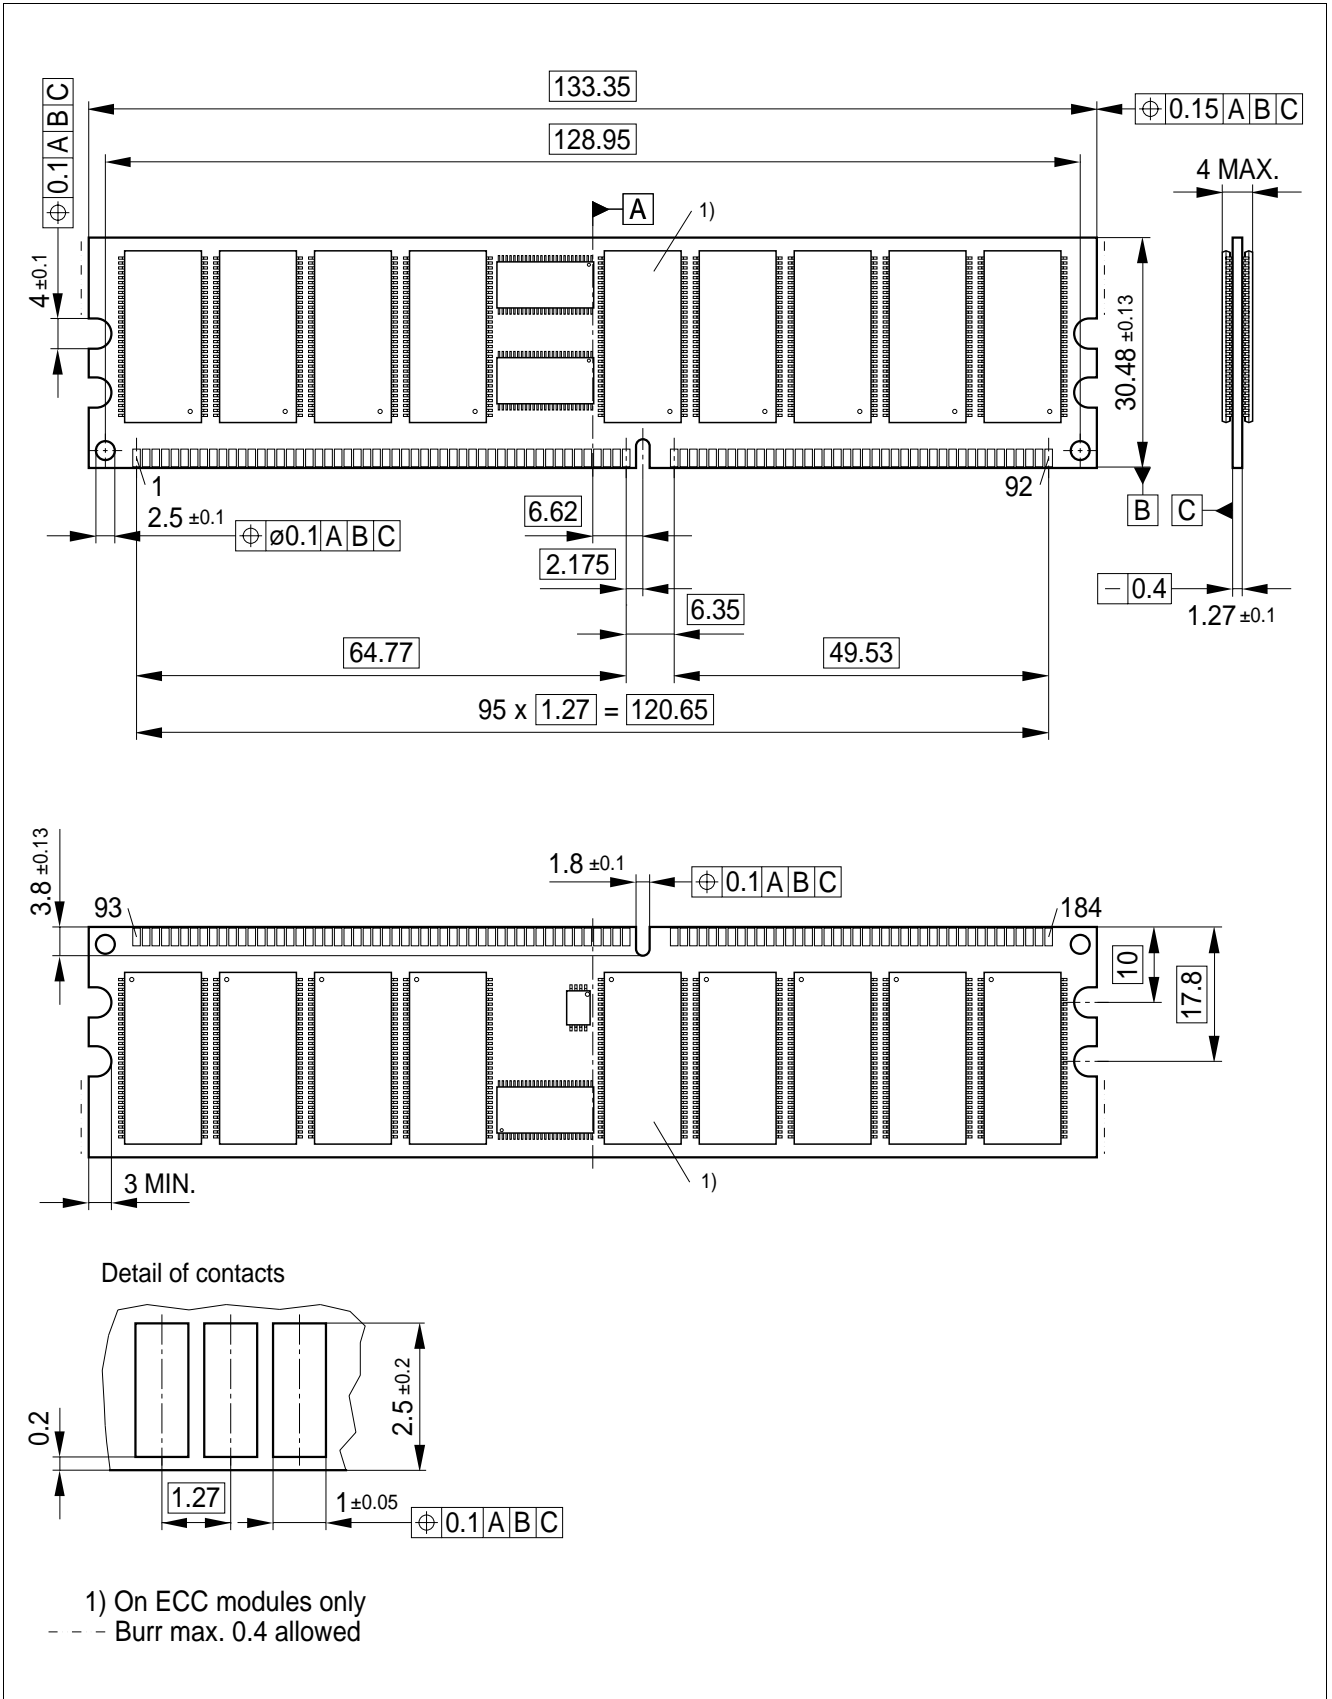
Package Outlines Raw Card M (L-DIM-184-12)
